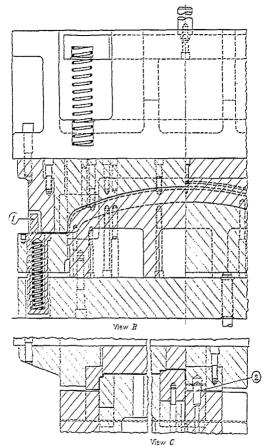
B. Onew die for the front panel of a space heater; view B, lateral gives section, and view C, longitudinal gross section. (Motor Wheel Corp.)
